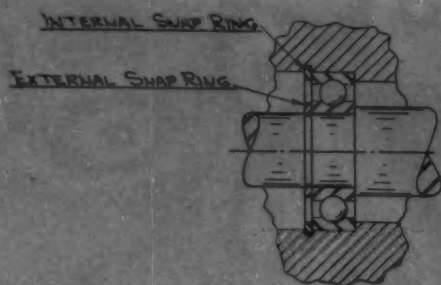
Ball bearing is held both on shaft and in housing with snap-rings. The rings may or may not be re-used depending on the application of the bearing.
